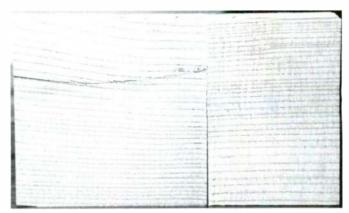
Saw blade check on a piece of  $2 \times 2$  stock.
